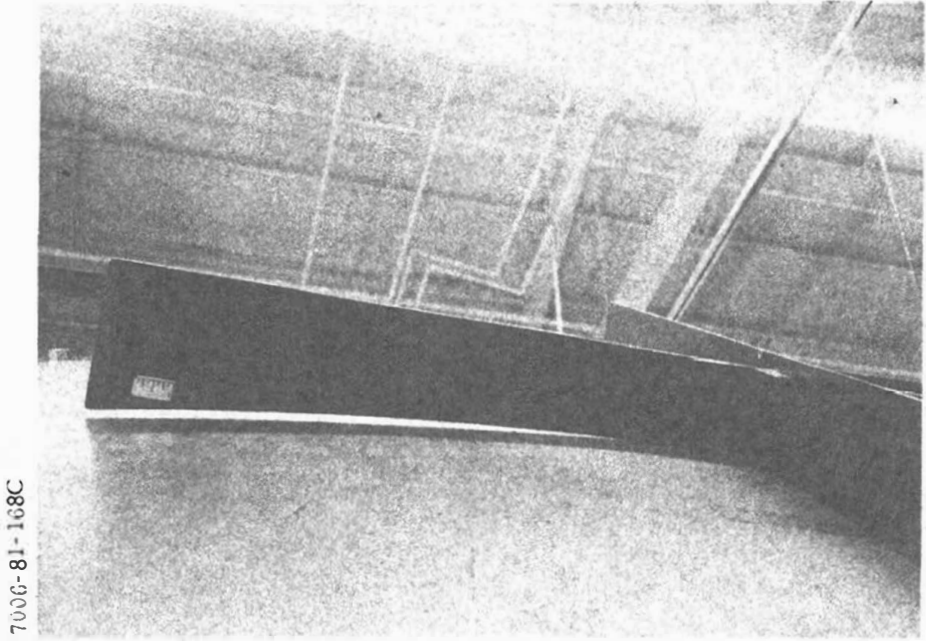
Bulkhead Fitup Weld Test Showing Distortion
